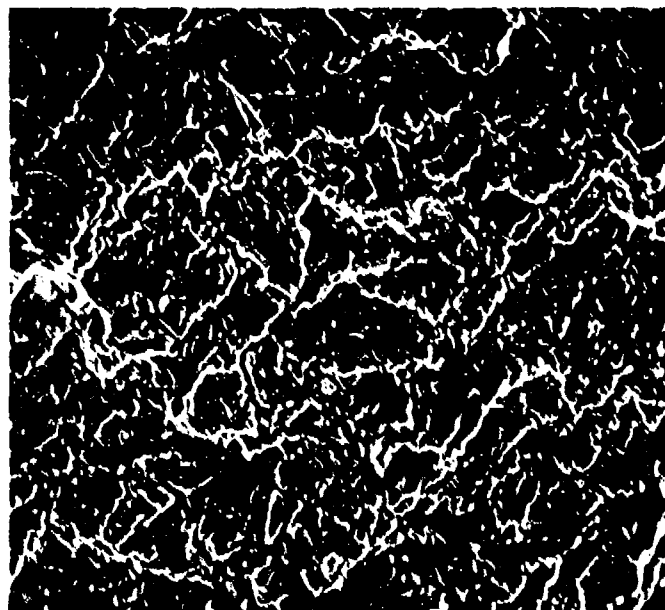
Fatigue region of fracture surface of an A-514 weldment containing porosity, 1380x.
